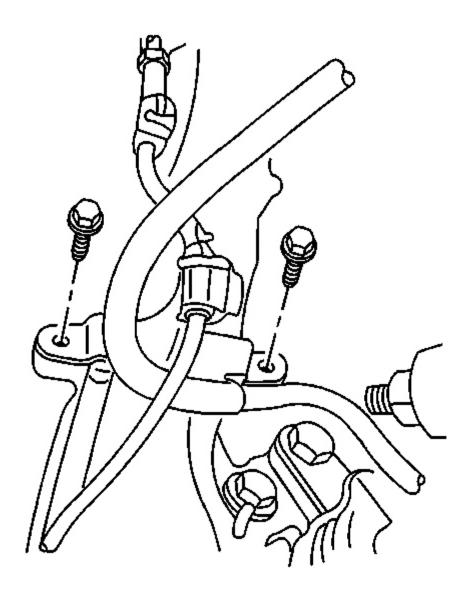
Removing/Installing Brake Hose Bracket Retaining Bolts Courtesy of GENERAL MOTORS CORP.
